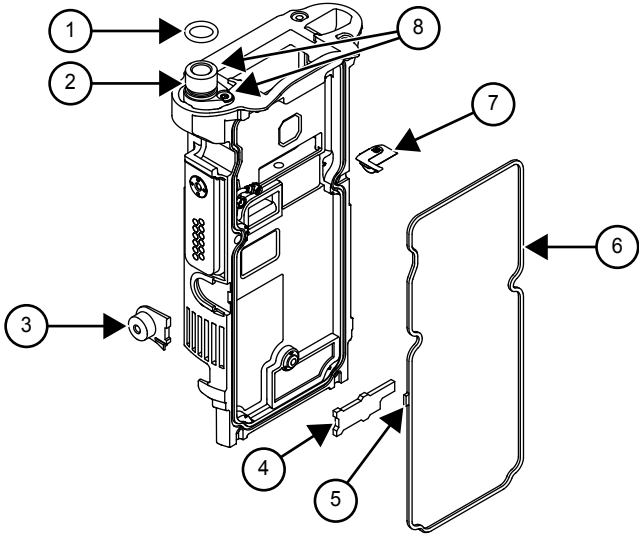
Serviceable Components – Main Chassis Assembly - APX 8000XE
